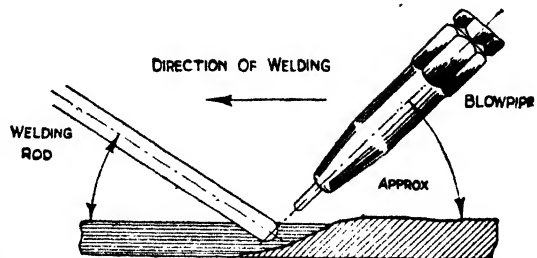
COPPER WELDING — UNDERHAND TECHNIQUE
